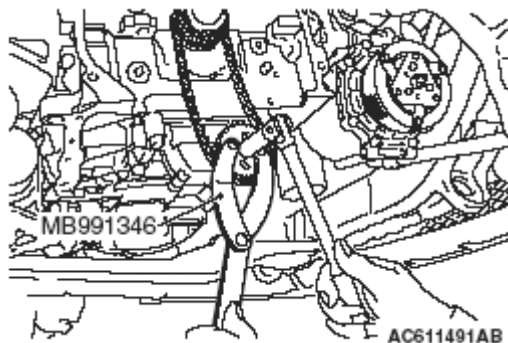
Holding Oil Pump Sprocket With Special Tool MB991346
